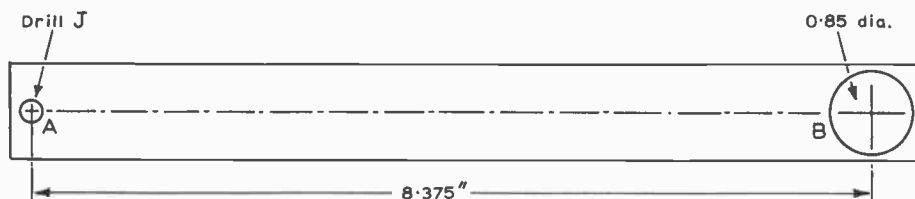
When turntable and pickup arm are assembled place hole A over spindle and hole B over pickup arm pillar. Draw round the base to mark selected position.
